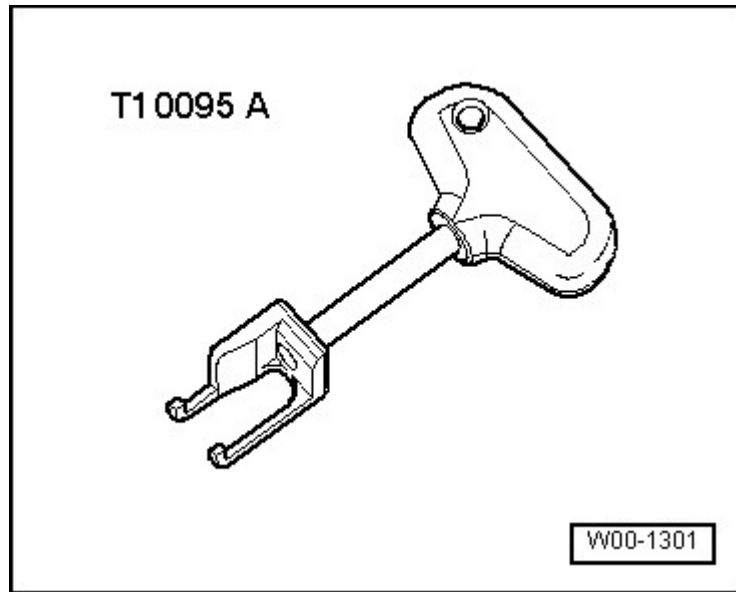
Identifying Puller For Ignition Coil T10095 A
